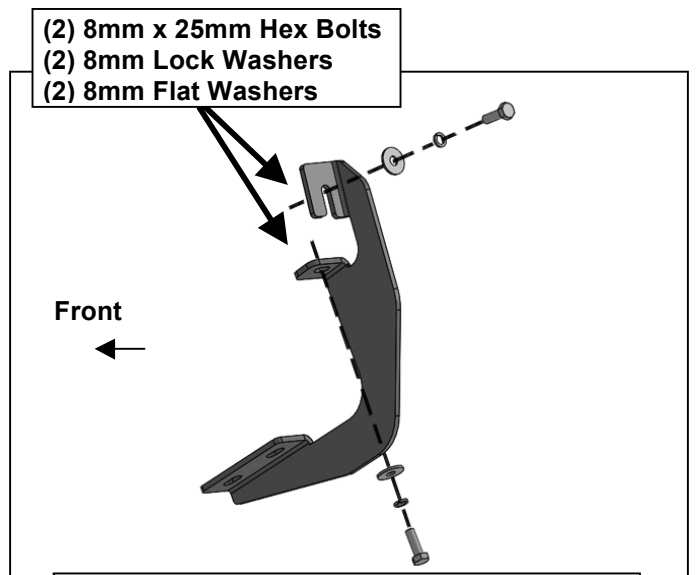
Passenger side mounting locations along bottom and back of body panel illustrated
